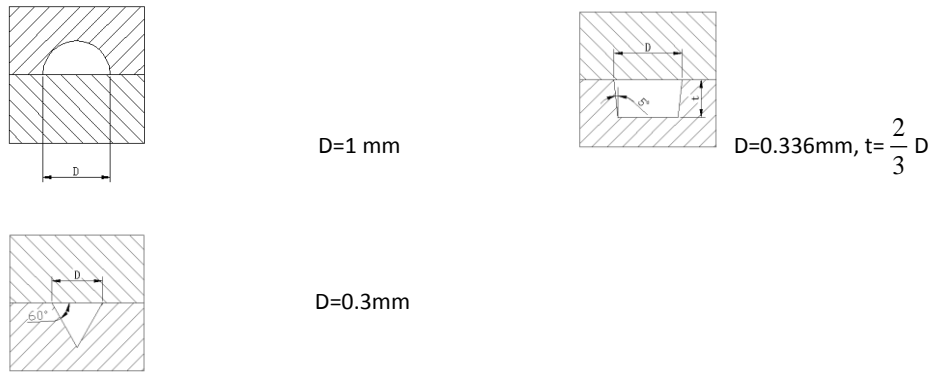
Geometry and dimensions of the different cross section shapes for micro tensile sample
